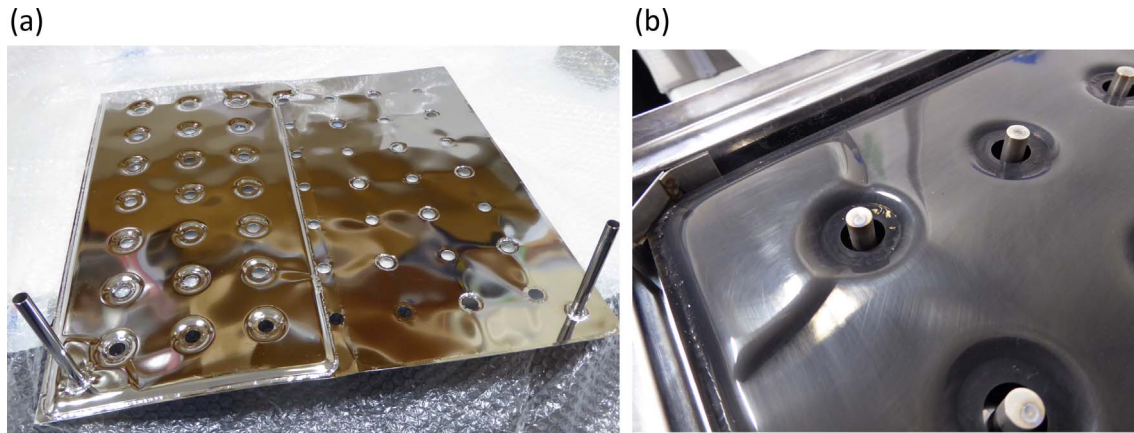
(a) Absorber after TIG welding and electro-polishing to prepare for black chrome plating. This view of the underside shows the perpendicular feed tubes that pass through a stainless steel tray forming the rear of the enclosure. (b) Black chrome plated absorber in a stainless tray prior to soldering the cover glass in place.
